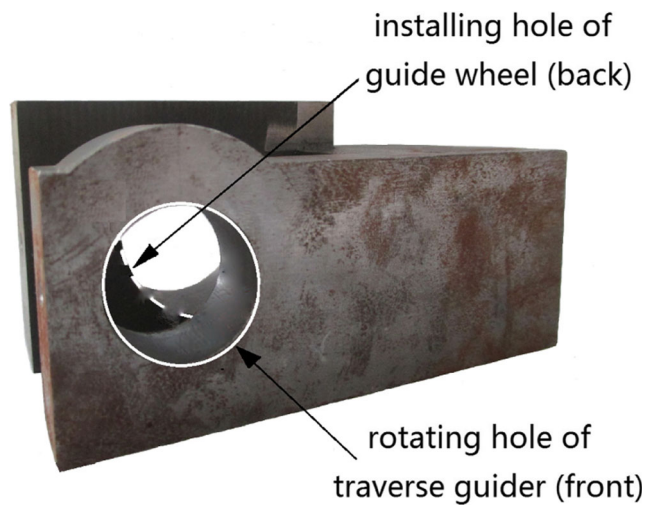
Head of the taper-cutting wire-guiding device that causes wear but no “angular error”
